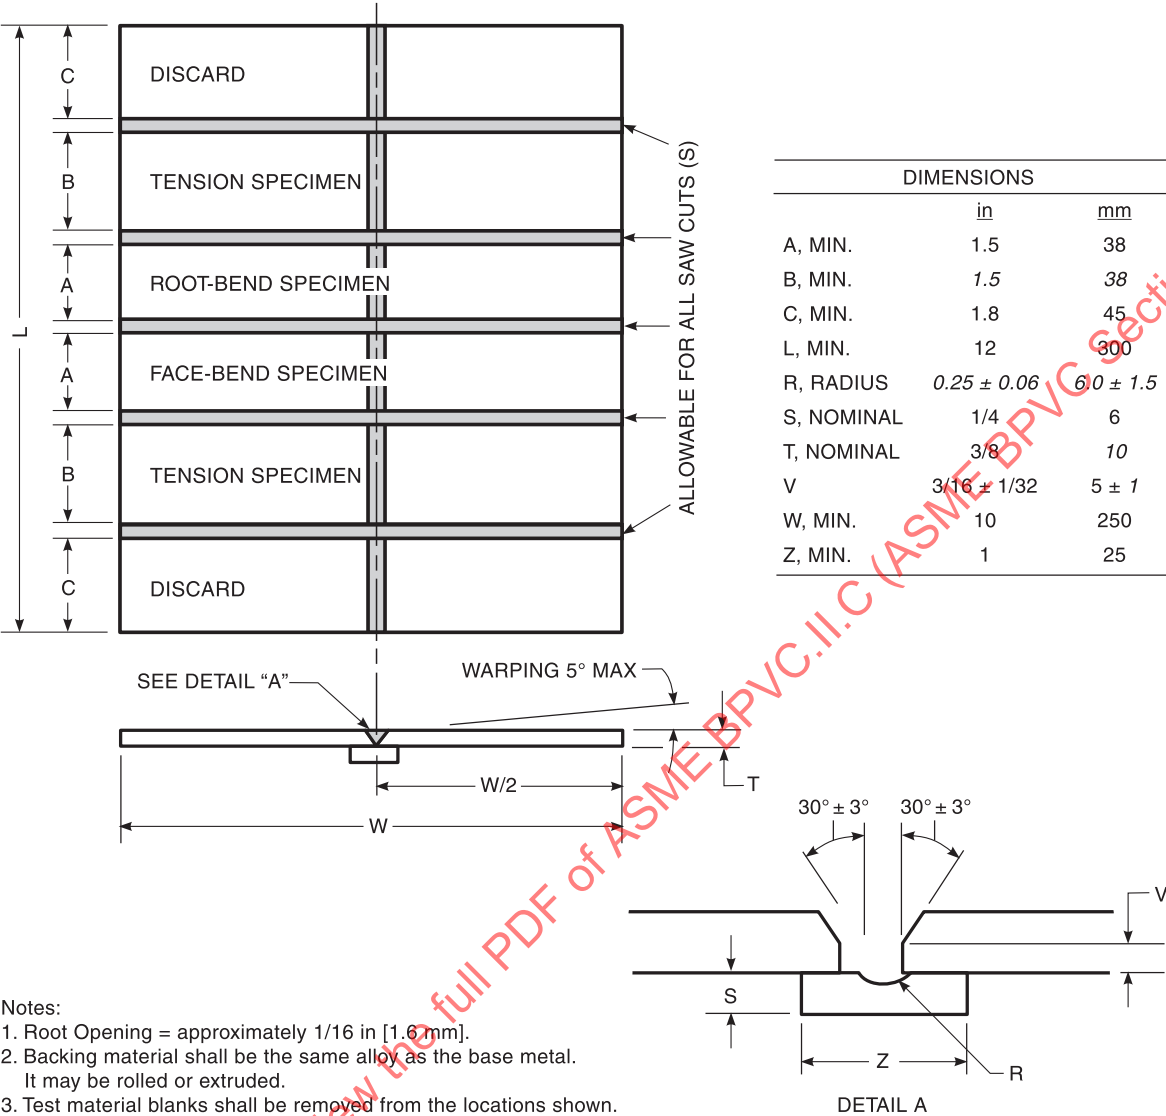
[1M]—Groove Weld Test Assembly for Mechanical Properties
